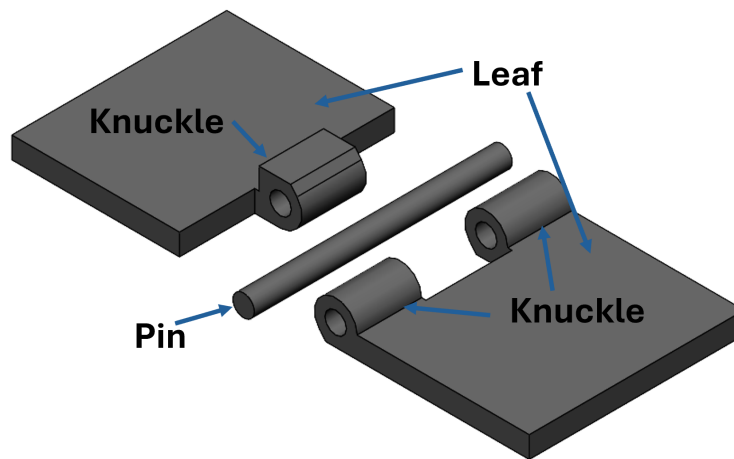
Exploded view of a hinge mechanism, illustrating the key elements of the hinge mechanism.
